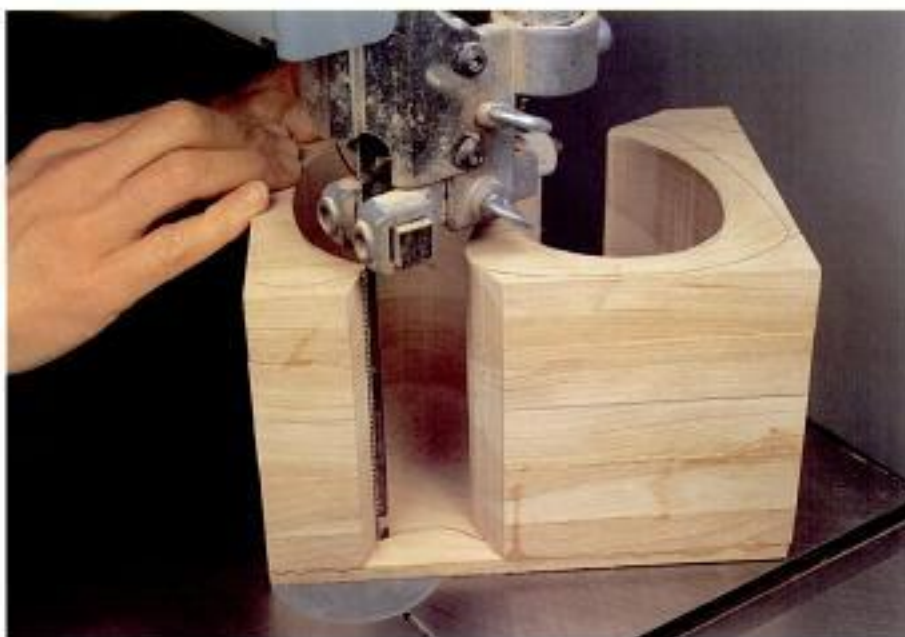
Cut the back piece at the open drawer ends slightly small so you can sand it to shape with the drums later.
